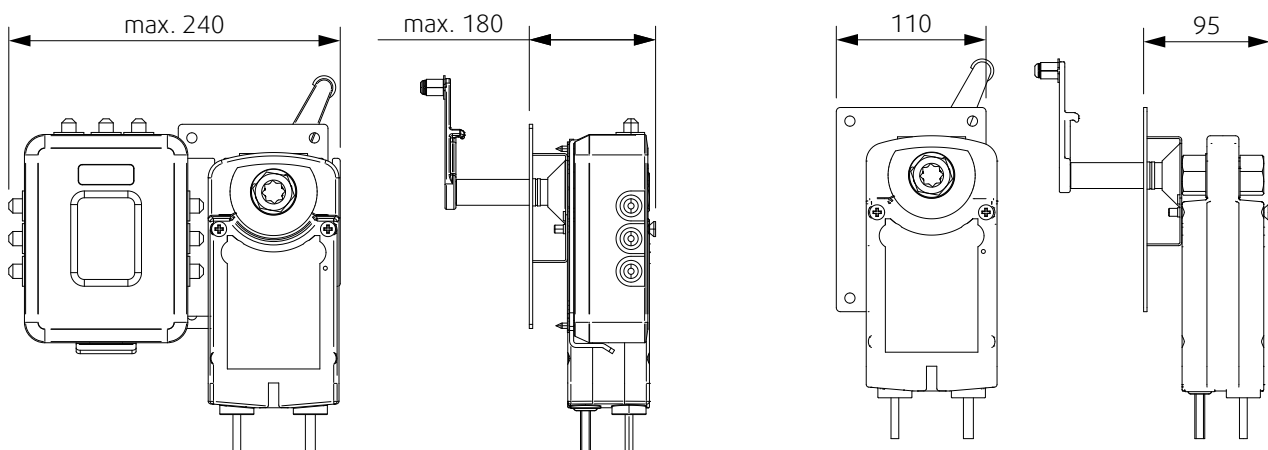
Dimensions of the Gruner actuator mechanism with (left) and without (right) communication unit
